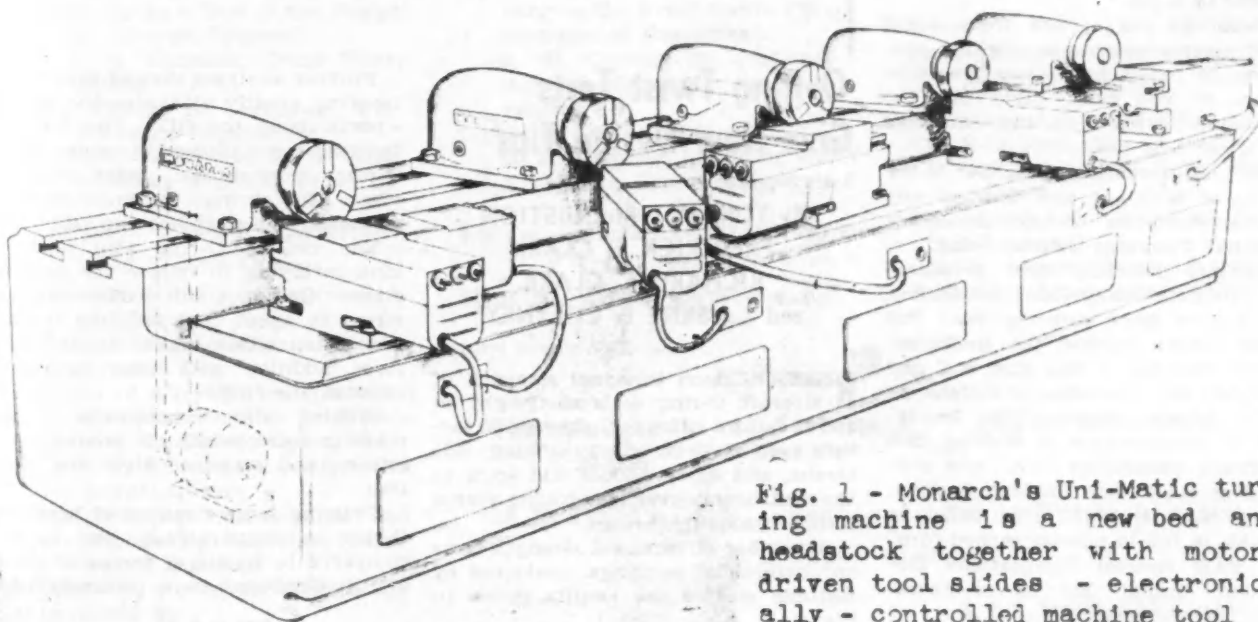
Monarch's Uni-Matic turning machine is a new bed and headstock together with motor-driven tool slides - electronically - controlled machine tool
